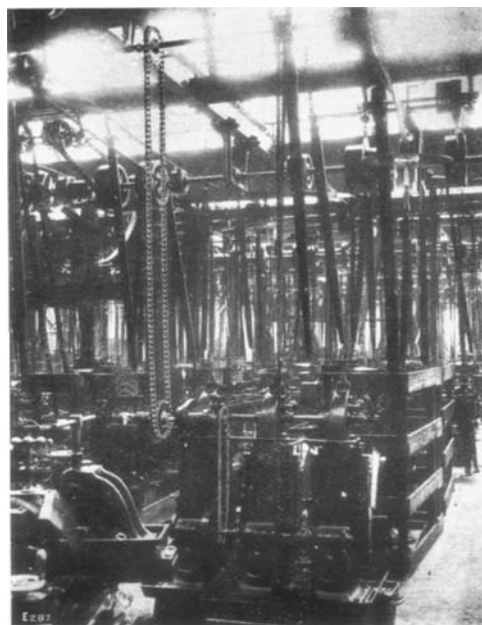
Three-Spindle Drill connected to Overhead Shafting by Roller Chain.
